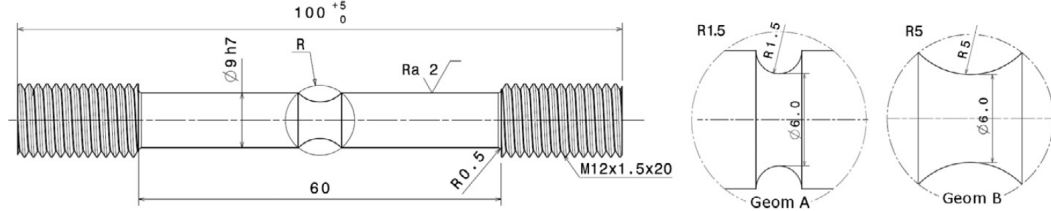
Specimen geometries and dimensions for the notched tensile test in the LD direction (dimensions in mm) [34].
